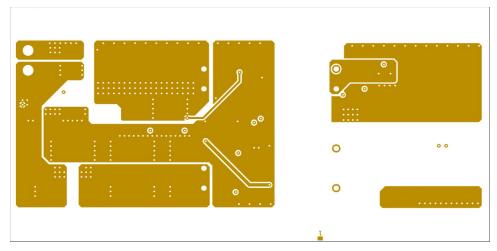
RDR-85SLR Mid-Layer 1 PCB Layout.
